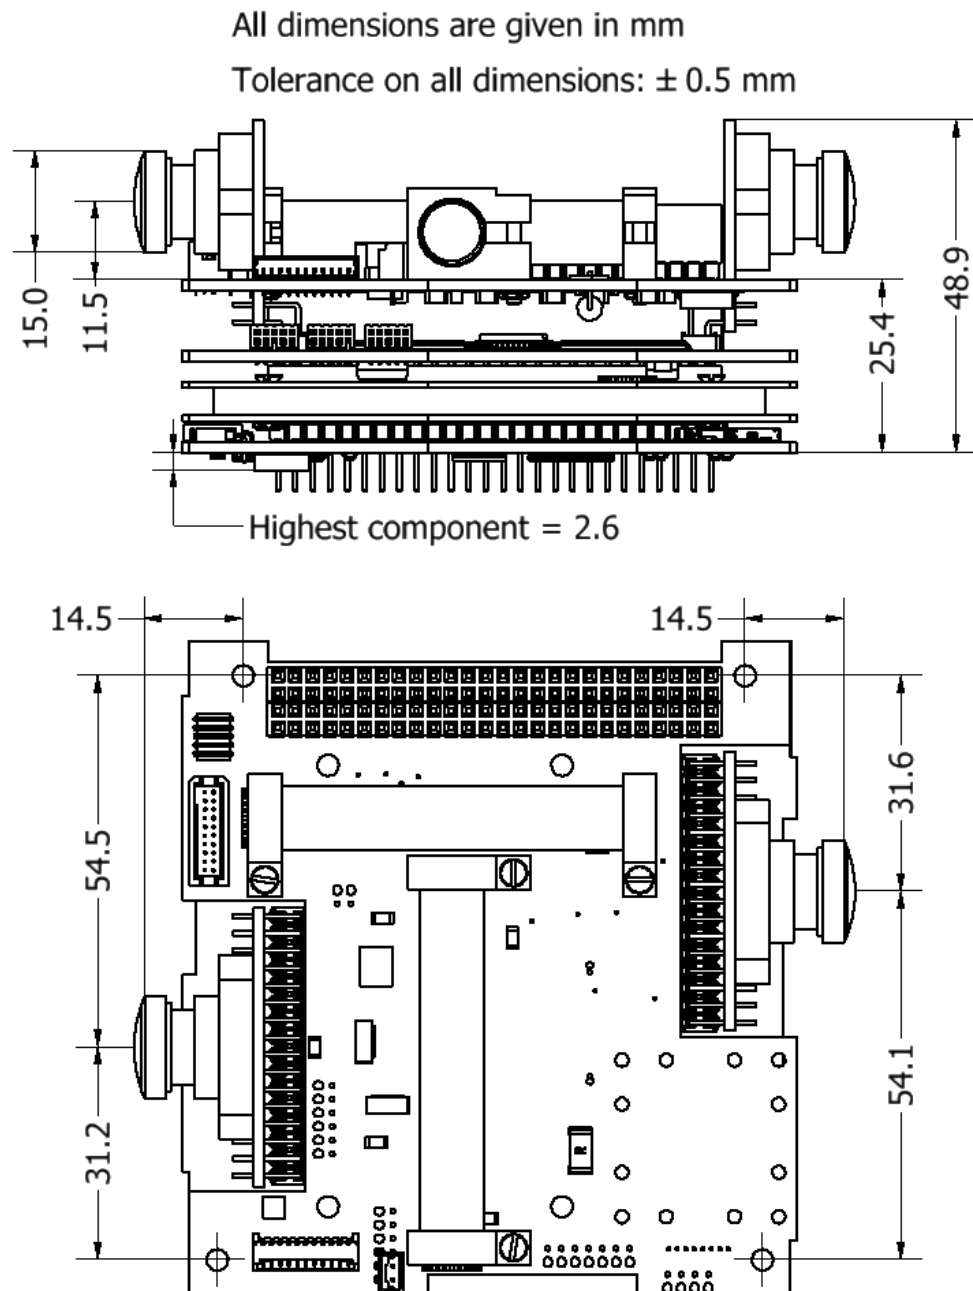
Dimensions of the PC104 stack of the CubeADCS unit.
